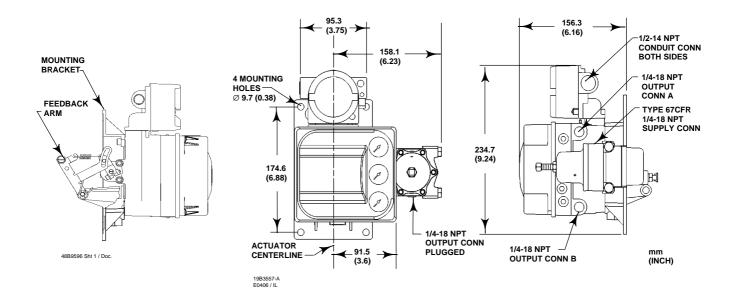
Dimensions for Type DVC6020 Digital Valve Controller with Integrally Mounted Filter Regulator
